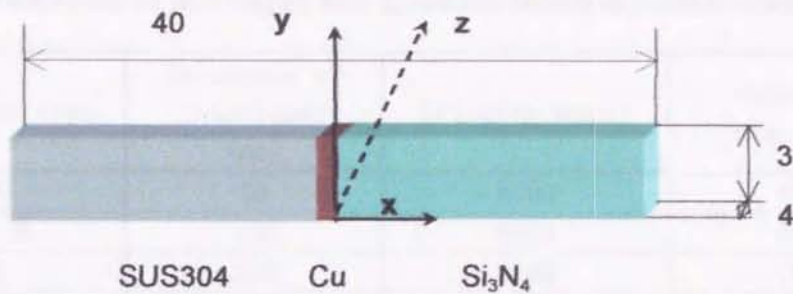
Shape of ceramics/metal joint specimen. (mm)
